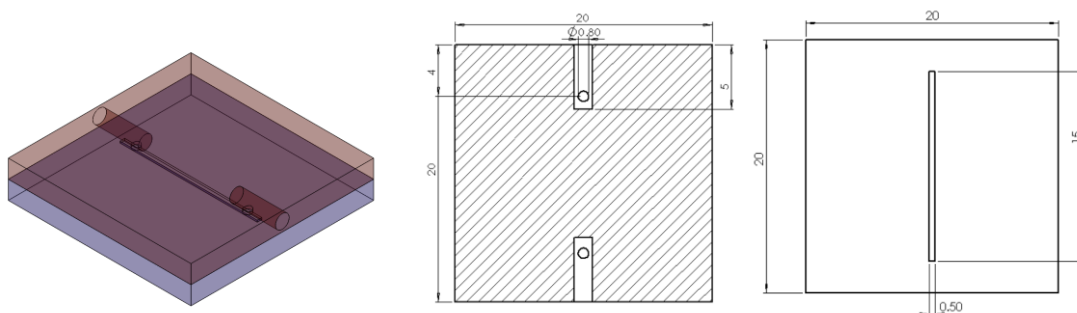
, Channel plates design (top plate in red (shown in center), bottom plate in blue (shown on right)) units in mm.
